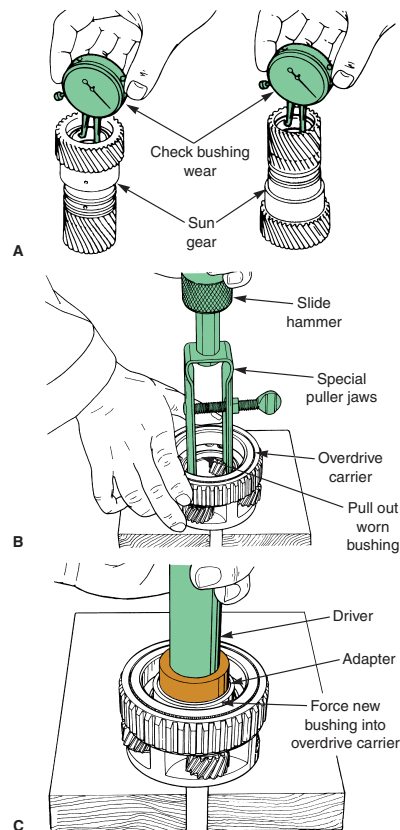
Check all bushings for wear and replace those that are worn. A—Checking a sun gear bushing. B—Removing a planet carrier bushing. C—Installing a new planet carrier bushing. (DaimlerChrysler, General Motors)
